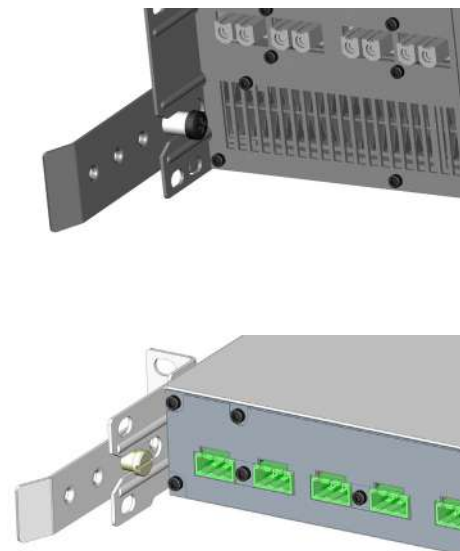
Rear support bracket mounted for removable installation and bracket pointing towards rear
